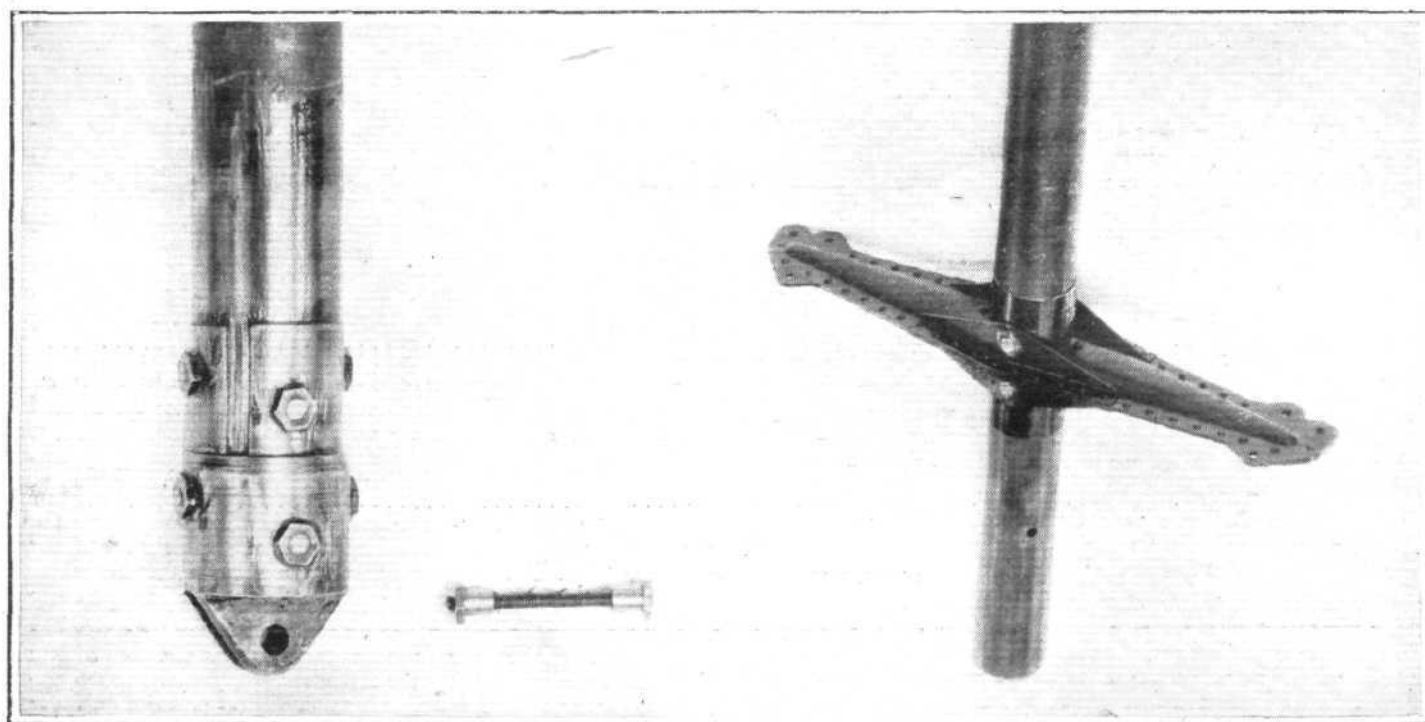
(on left) shows a typical mechanical joint, in which fastening is by collar nuts and screwed tie-rods. Fig. 2 (right), shows rudder lever made up by riveting.
